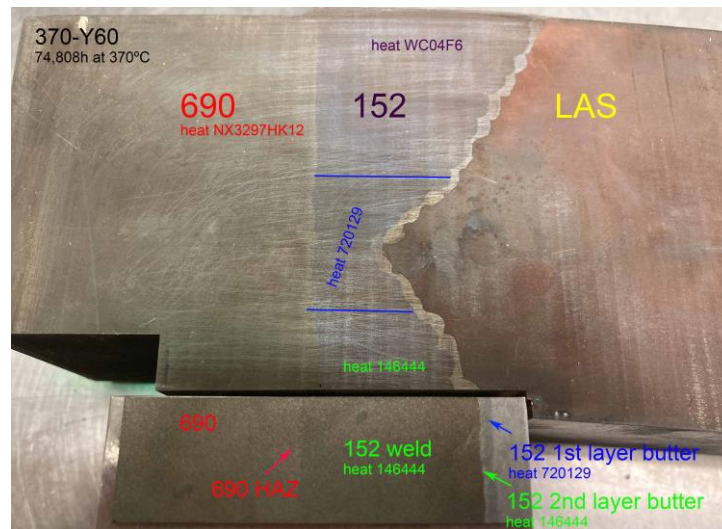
Alloy 152 weld joining Alloy 690 and Alloy 533 aged to a 60-year service equivalent. The three Alloy 152 weld heats are identified.
